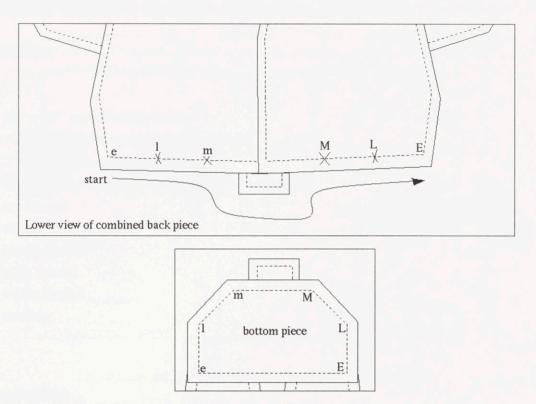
Guide to connecting the combined back piece to the bottom piece
